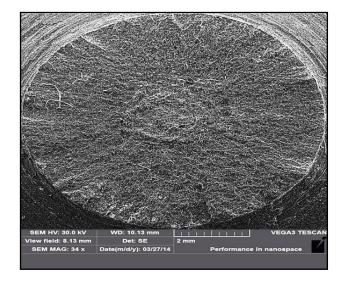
Fracture surface of a specimen subjected to the loading of bending
